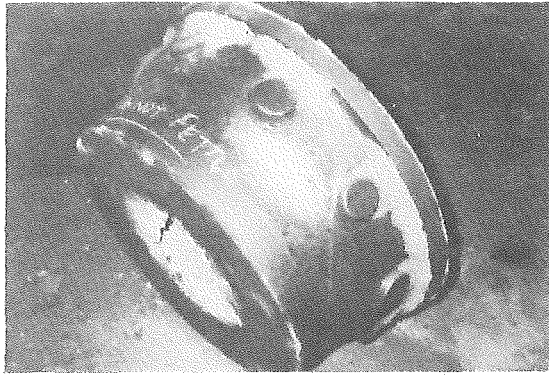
Centrispun casting produced from refractory-shaped mold—as cast—material FV507
